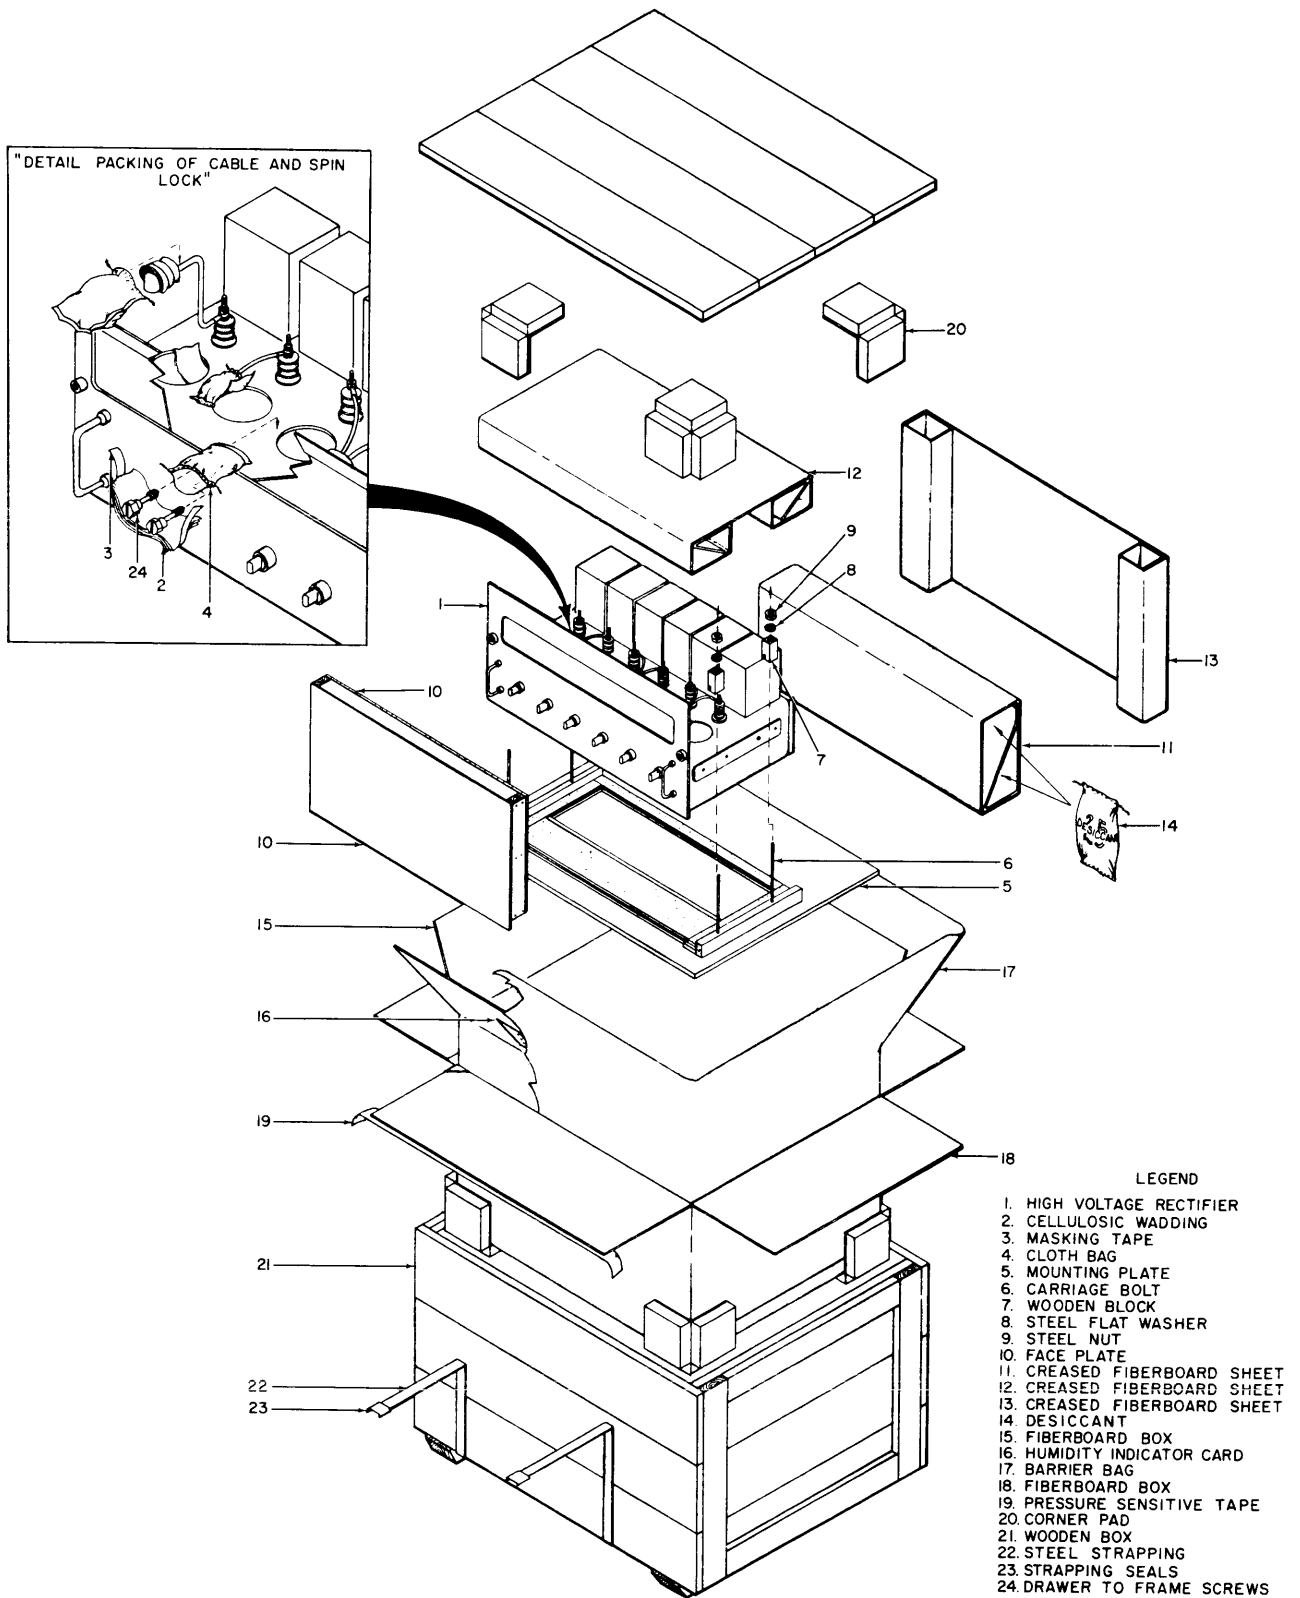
Typical Equipment Packaging (Sheet 4 of 4).
